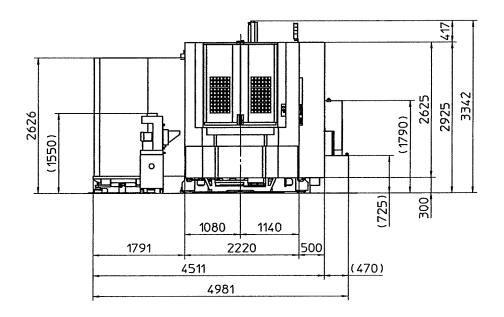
Front and Side View of Machine: a81 (Tool Magazine A186 or Above and Rear Discharge Lift-Up Conveyor)
